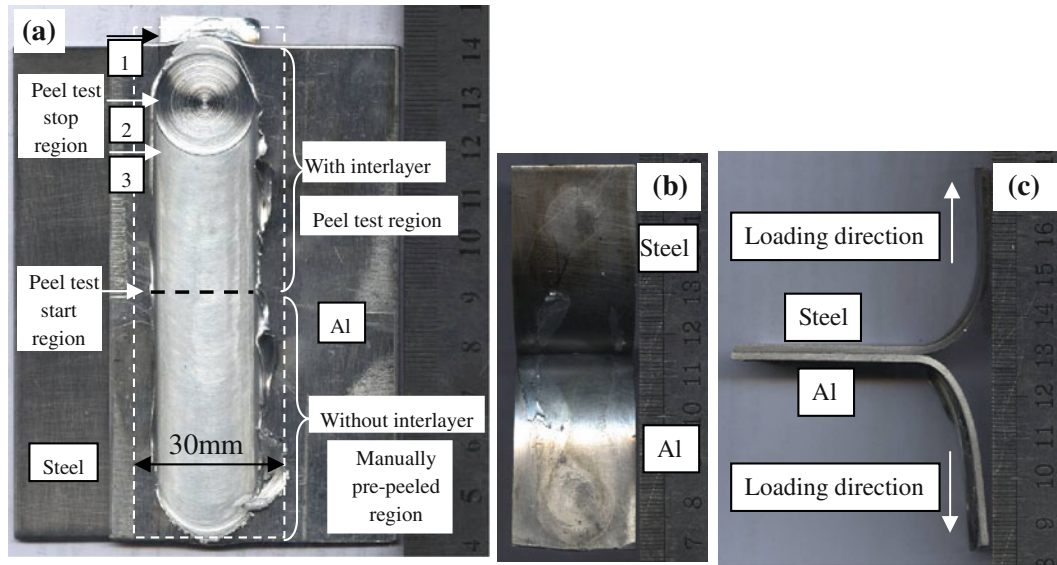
(a) Appearance of the joint for peel test, (b) the manually pre-peeled fracture surface of the part without Zn foil filler, (c) and the part with Zn foil filler of the same specimen for further peel test using a tensile test machine.
